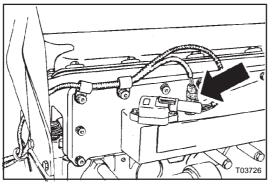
Intake manifold air temperature of Cummins engine fuel system (drawing shows M11+ engine)
